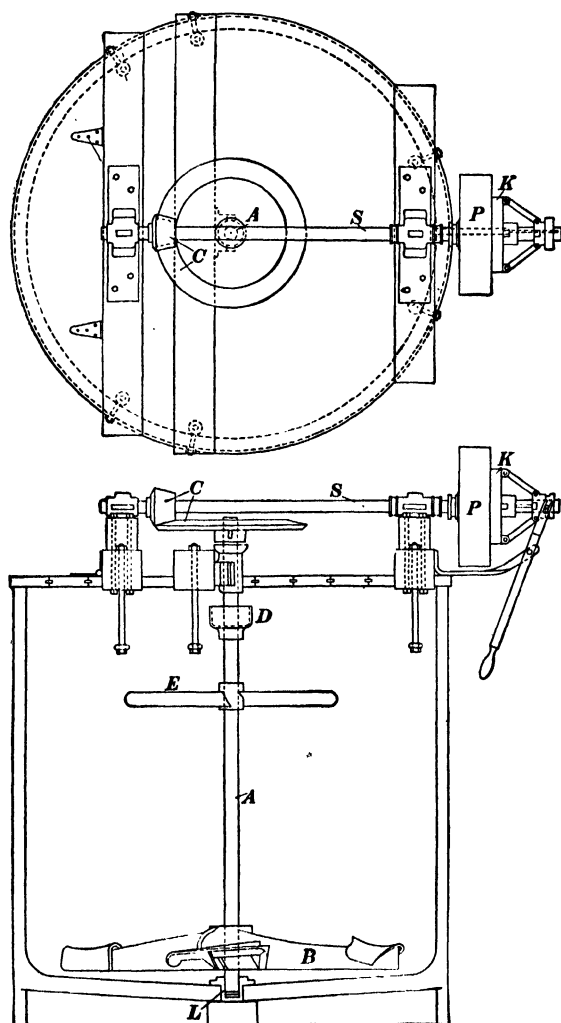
A, agitator shaft; B, agitator blades; C, driving gears; D, grease catcher; E, agitator arms; K, clutch; L, foot bearing; P, drive pulley; S, drive spindle.
